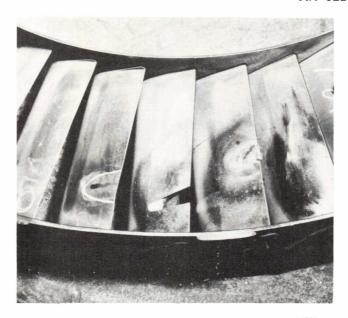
Weld Repair of Cracked Turbine
